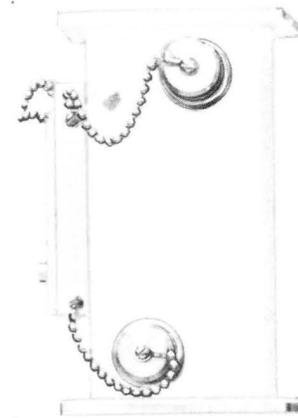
ED-52277, G2 Monitor-Shutter Assembly
